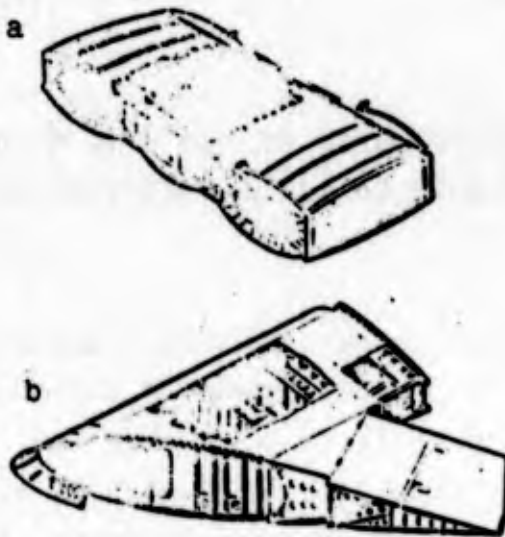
Center section (a) and the middle part (b) of the TU-124 wing.
